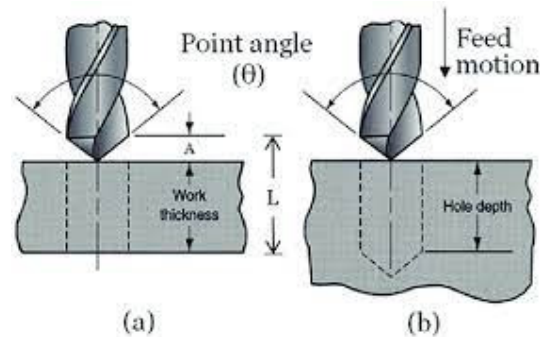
Illustrates the (a) Through Holes and (b) Blind Holes.
